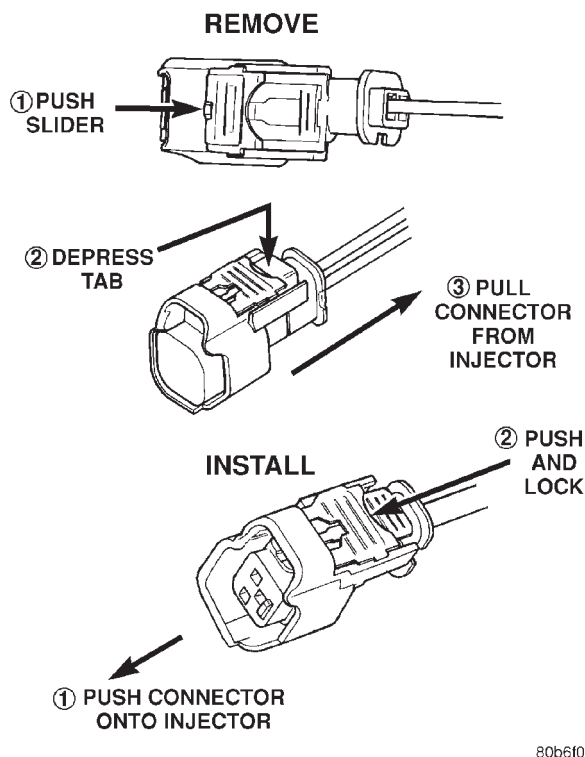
Remove/Install Injector Connector—4.7L V-8 Engine
